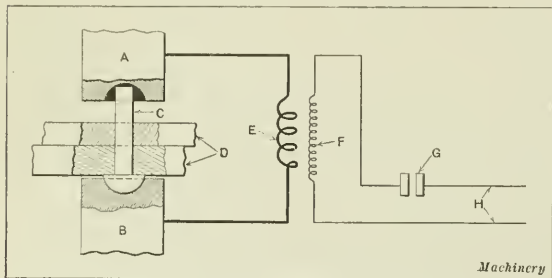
Diagram illustrating Application of Electric Spot-welding Machine for Electric Riveting, showing Electrical Connections
